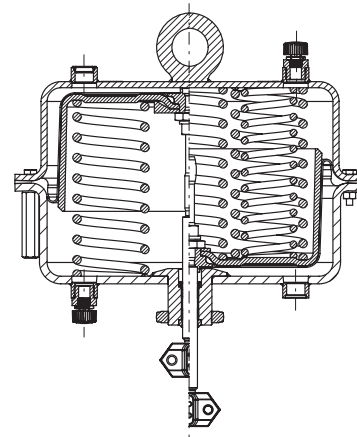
· Sectional drawing of Type 3271 Actuator with 1000 cm²
